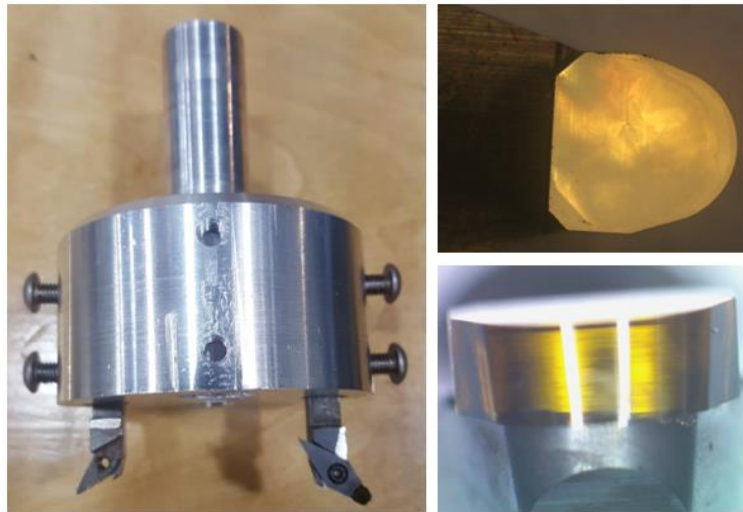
The holder developed for the MDFM process and the diamond cutting tool edge.
